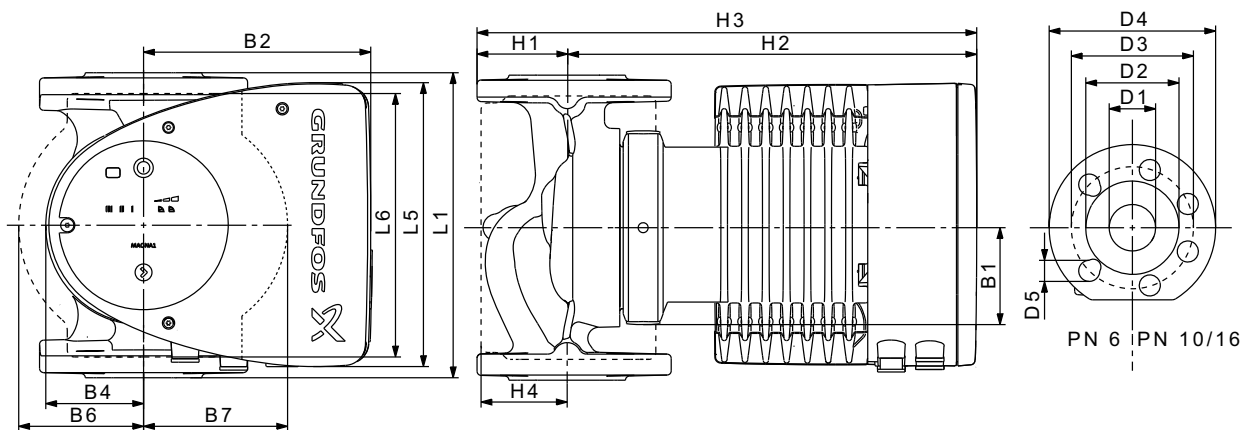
Single-head pump dimensions, terminal-connected versions, flanged version
